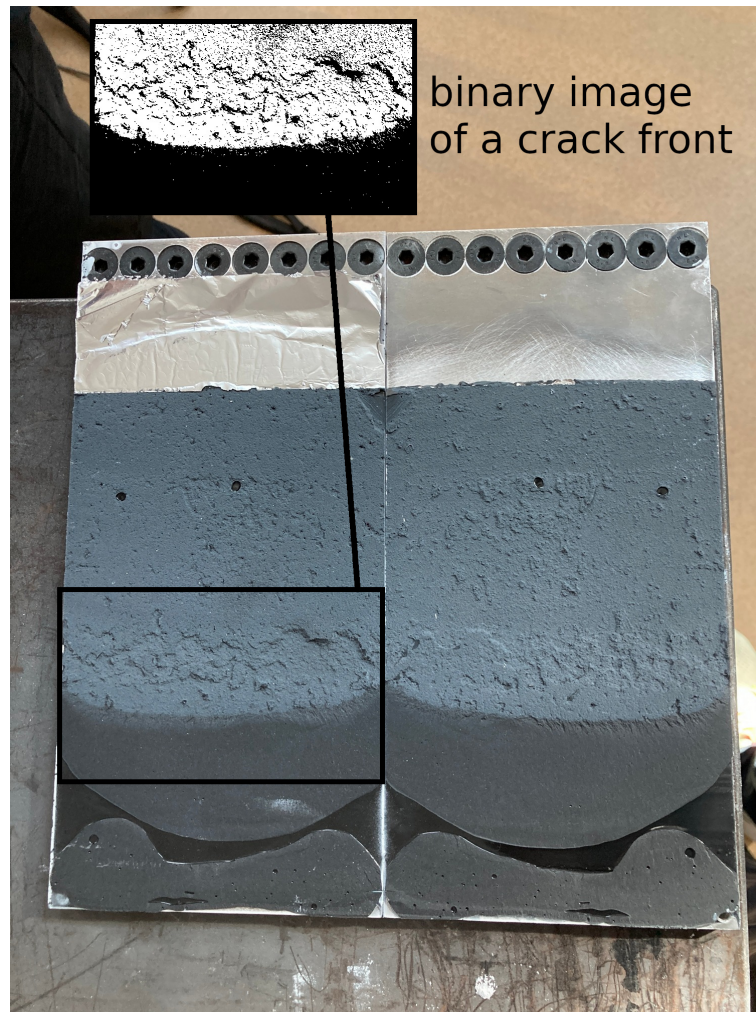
Inspection of fracture surfaces for specimen 120-1 with enlarged crack front marks shown in binary pixel values
